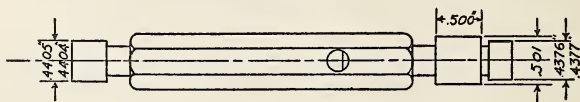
“Go” and “not go” gage for depth of threaded recess, and shank bore, B size.
